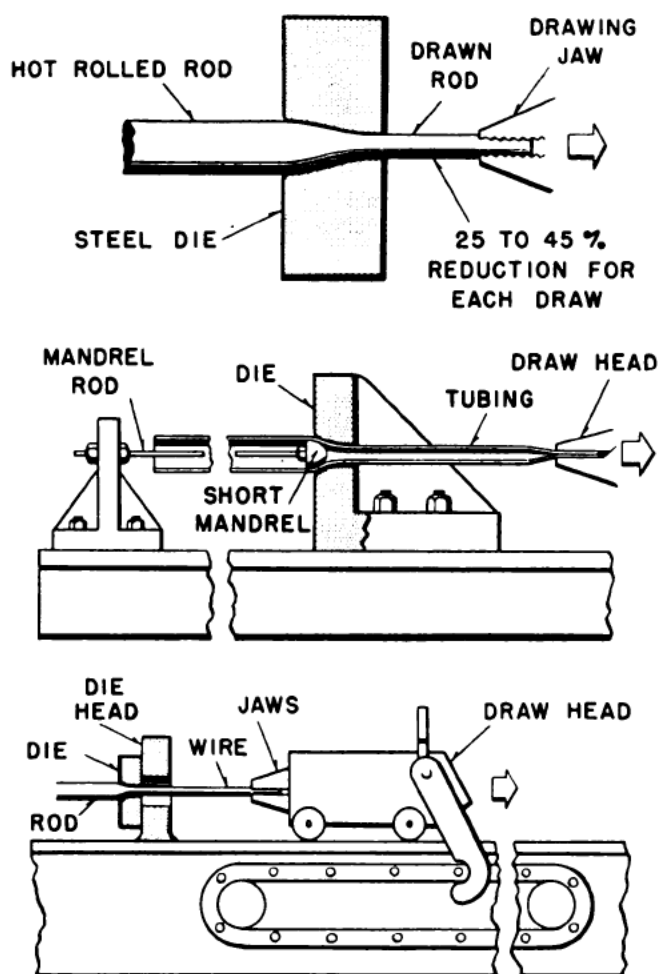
Top, method of cold drawing wire. Center, cold drawing seamless steel tubing. Bottom, working principles of the draw bench.
